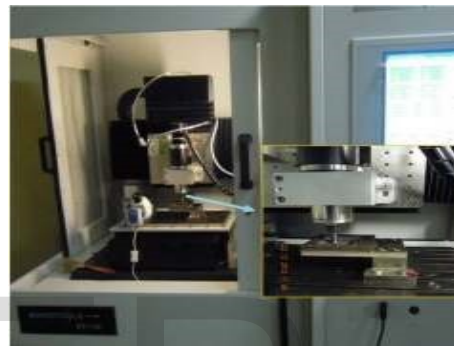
the incremental sheet metal forming set-up on MIKROTOOLS DT-110
